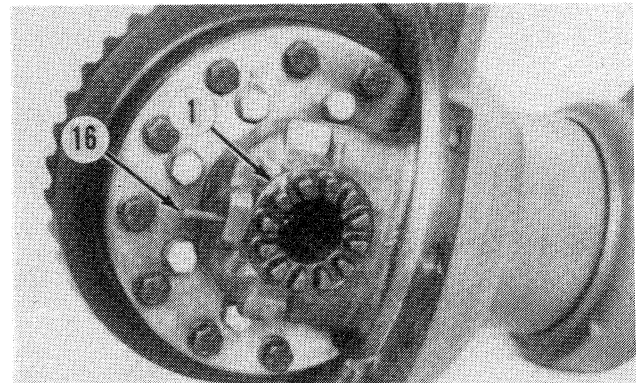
Prior to removing differential assembly, scribe match marks on bearing quills (1) and carrier housing. Drive out spring pins (16) until quills can be turned.
